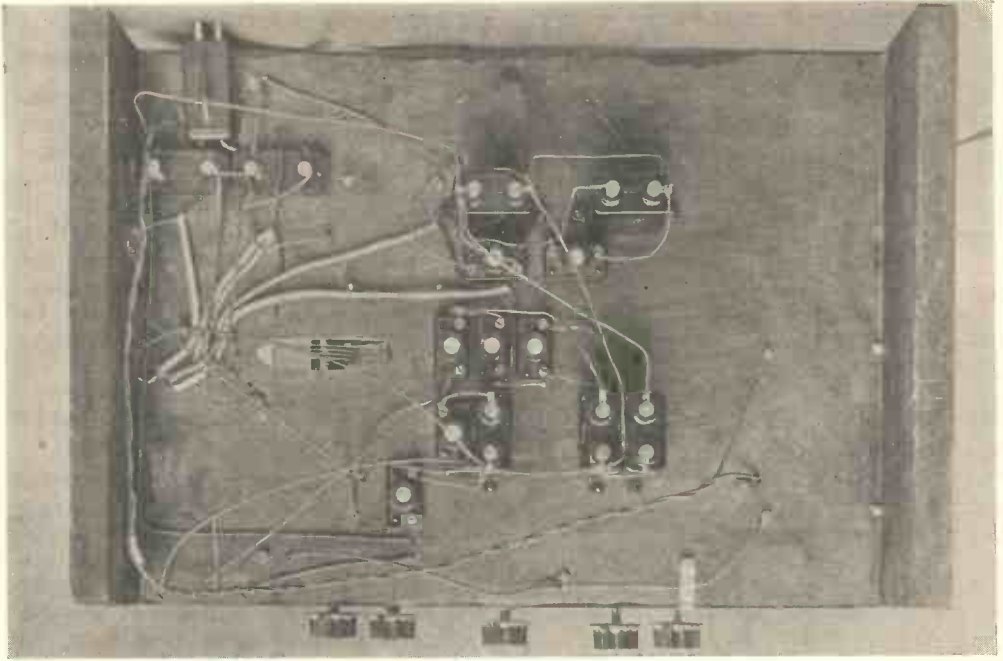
HERE WE SEE THE UNDER BASEBOARD WIRING AND LAYOUT OF COMPONENTS.
